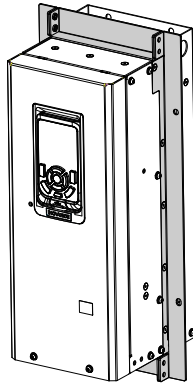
AC drive with brackets mounted (T1 to T9 models)
